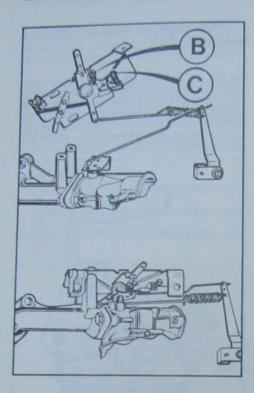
RM engines control plate B = High speed adjustment screw C = Low speed adjustment screw
